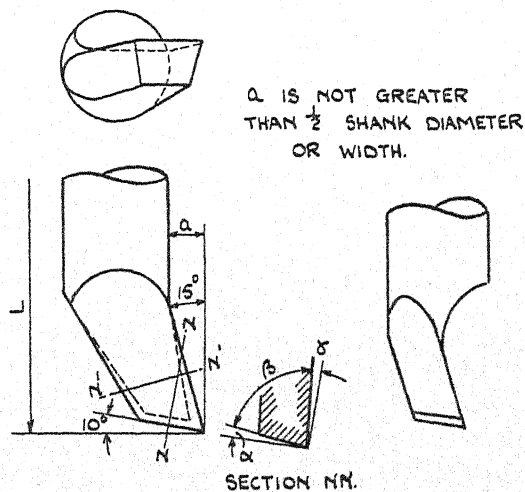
INTERNAL SIDE TOOL FOR BORING BLIND HOLES.
